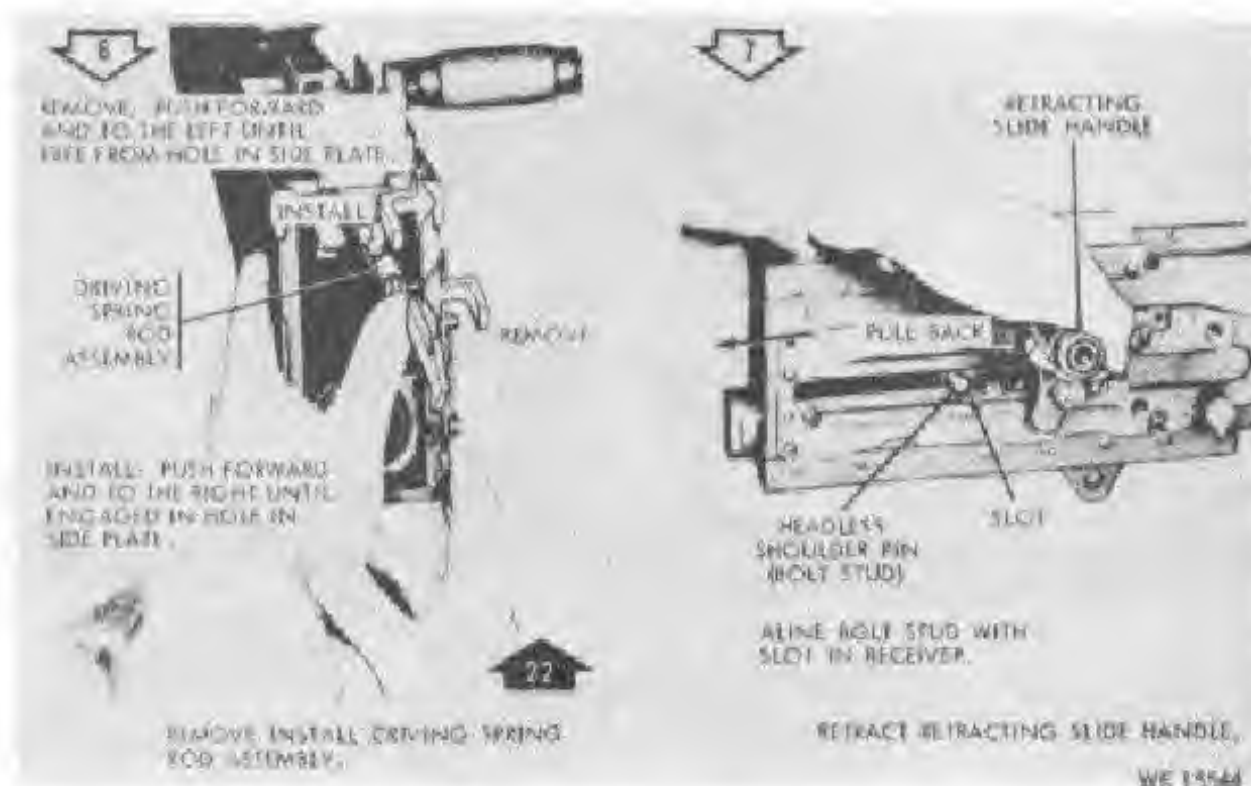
Disassembly/assembly of Caliber .50 Machine Gun, M2. (4 of 20)
